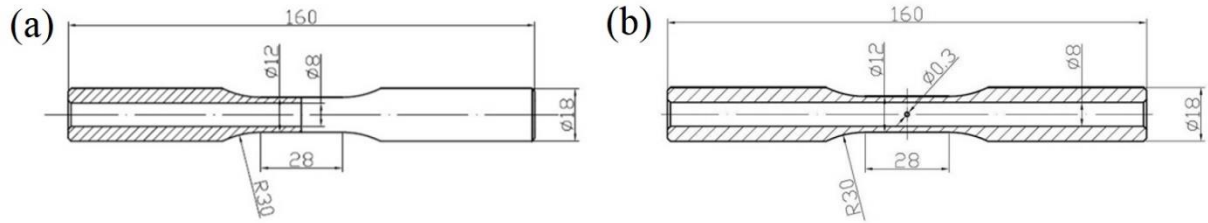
Design of specimens used for (a) fatigue life tests; (b) crack growth rate tests.
